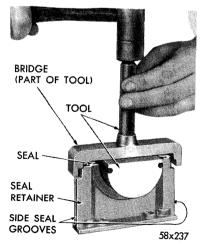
Installing Rear Main Bearing Lower Oil Seal
